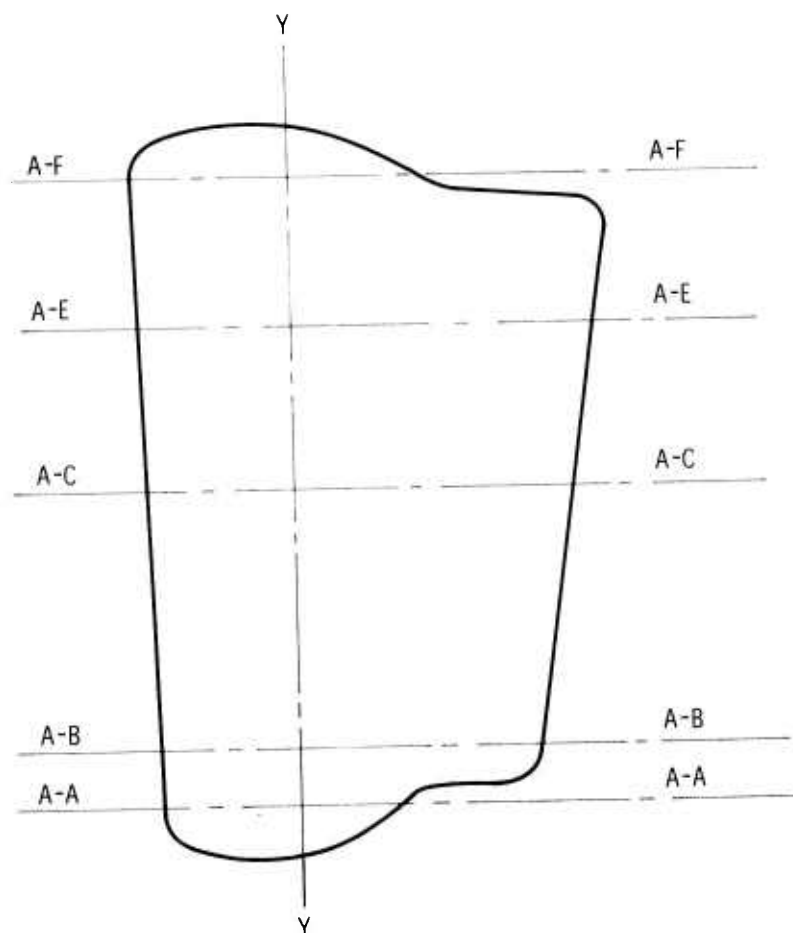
Tapered-Twisted Airfoil Section - Stator Vane Assembly for Rotating Turbine Test
